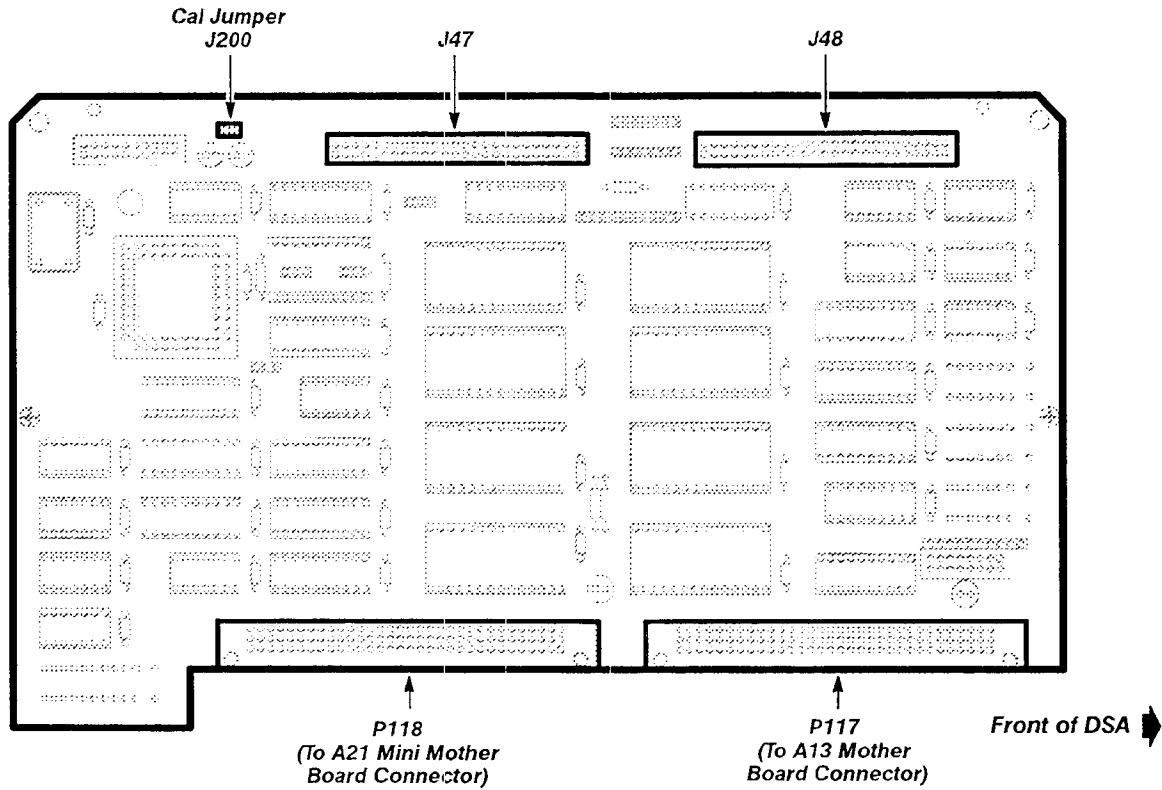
Removing/Replacing the A19 Digitizer CPU Board
